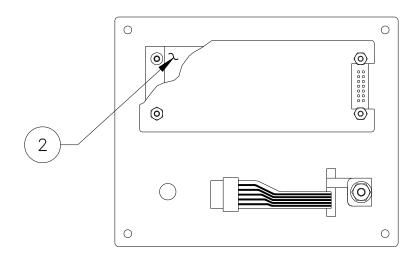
PF2405 VENT MANIFOLD ASSEMBLY
